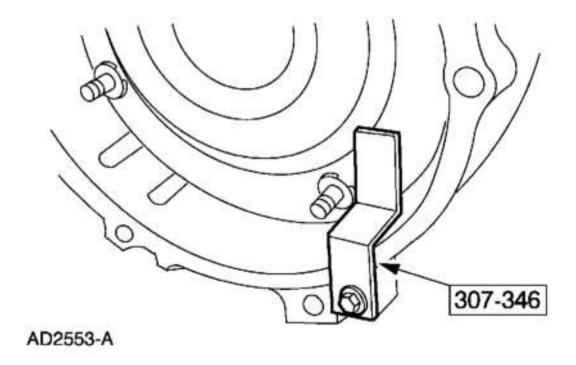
Installing Special Tool Courtesy of FORD MOTOR CO.
